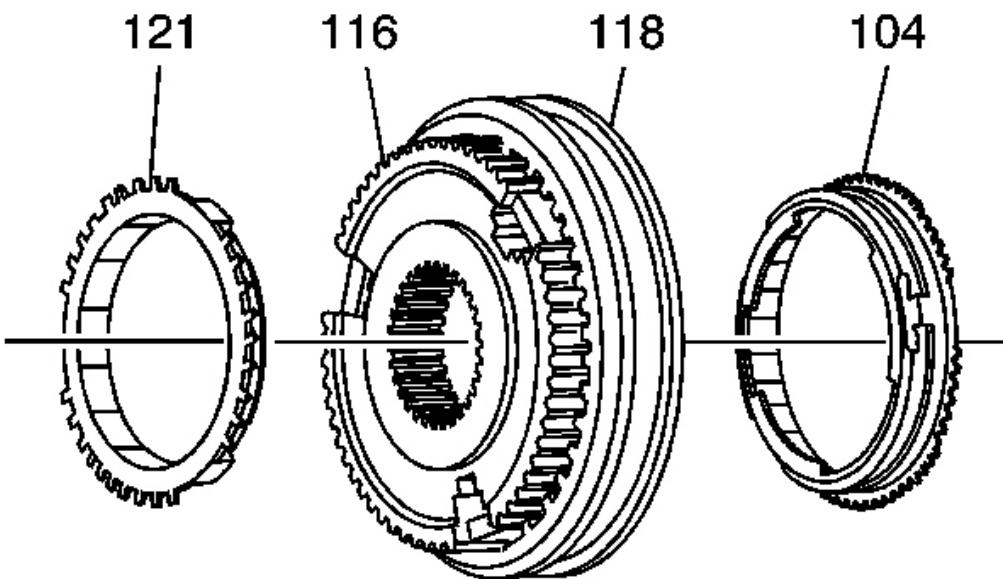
View Of 3rd/4th Gear Synchronizer Hub & Blocking Rings
